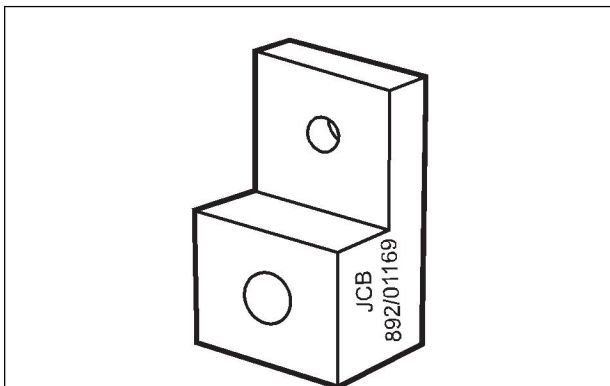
892/01169 Top Dead Centre (TDC) Setting Tool
